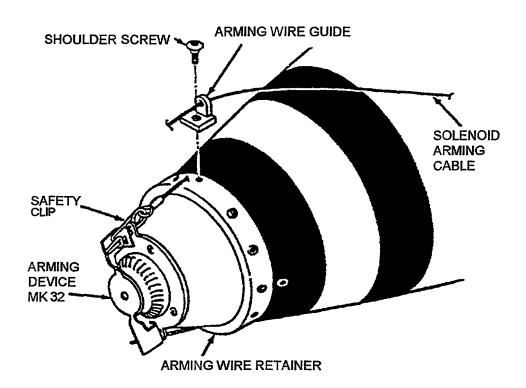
C. Tail Section Mk 16 Solenoid Arming Cable Removal from Arming Device
